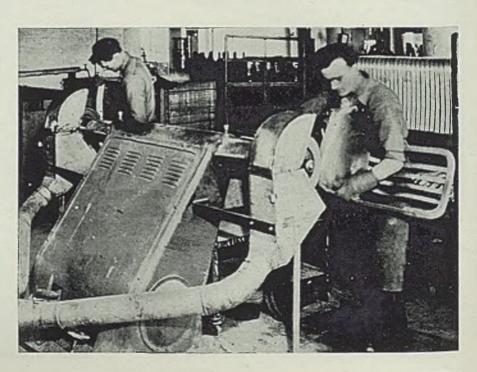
Considerable polishing and buffing is necessary to bring out the smooth finish which is necessary on the product. The abrasive is strip cloth held over special wheels
